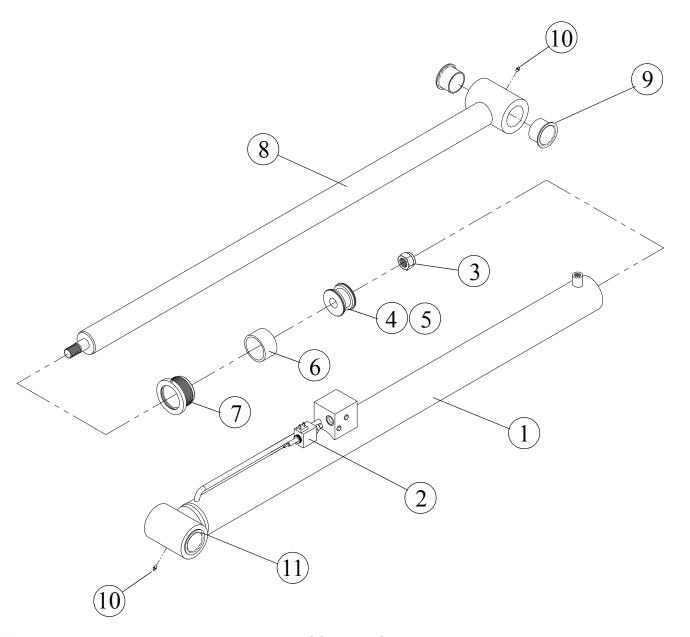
Hydraulic cylinder assembly of SL26/30SL
